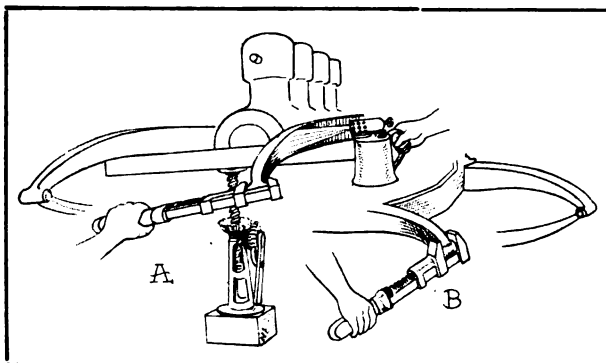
A, Straightening a Bent Frame After Heating; B, Truing up the Member with a Wrench.
